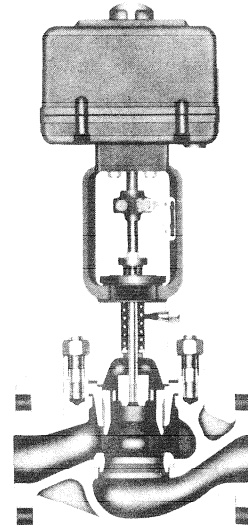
Model HCB Pressure-balanced Cage-type Control Valve
